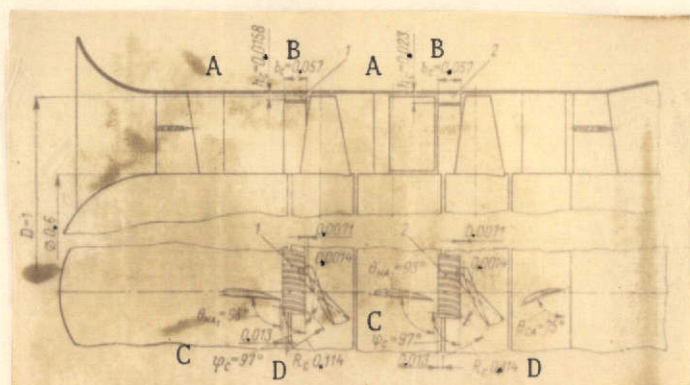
Layout of separators ahead of rotors and mean dimensions of separators:
